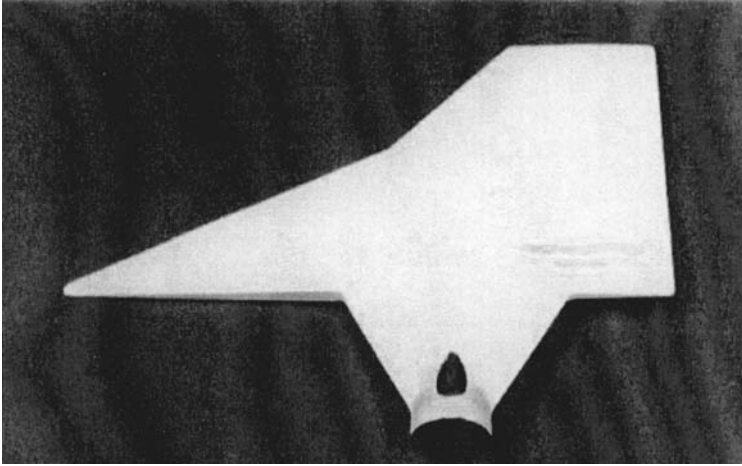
Superplastic formed inner skin of an access-door panel.
